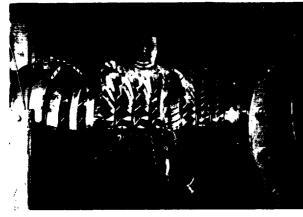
Typical axial-flow-compressor failure resulting from fatigue of one first-stage blade.
